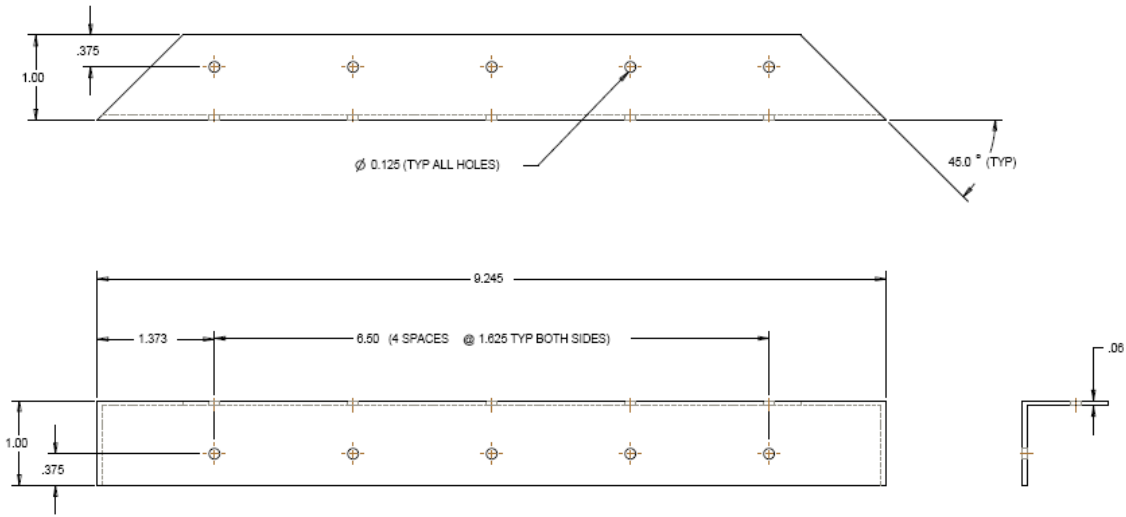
Dimensioned drawing of modified spin coater cover back
